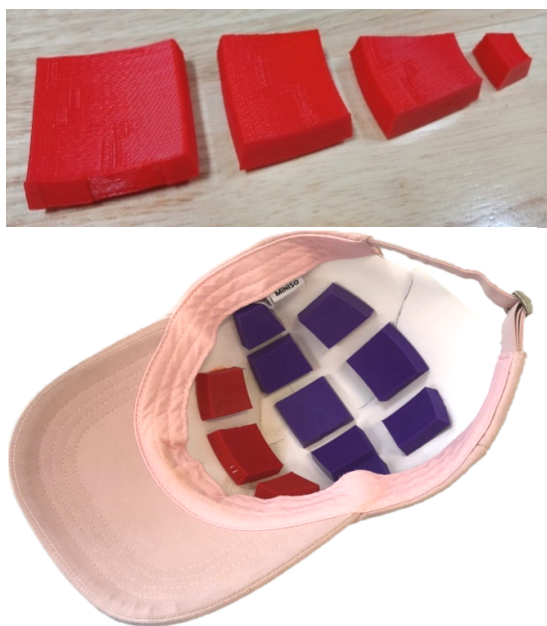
Padding parts printed by XYZ da Vinci 1.0A-3D printer.
